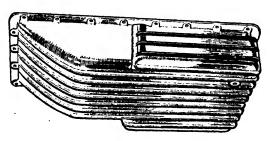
RIBBED ALUMINIUM ALLOY CRANKCASE OIL SUMP
